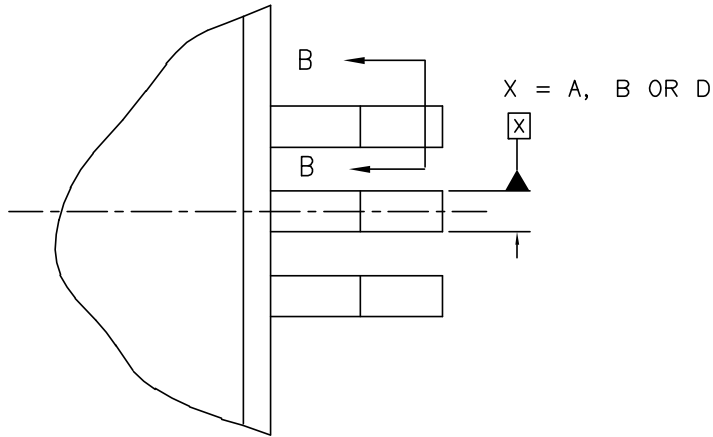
48-pin QFN Package Drawing (Case 1314, Doc #98ARH99048A), Sheet 3 of 3
